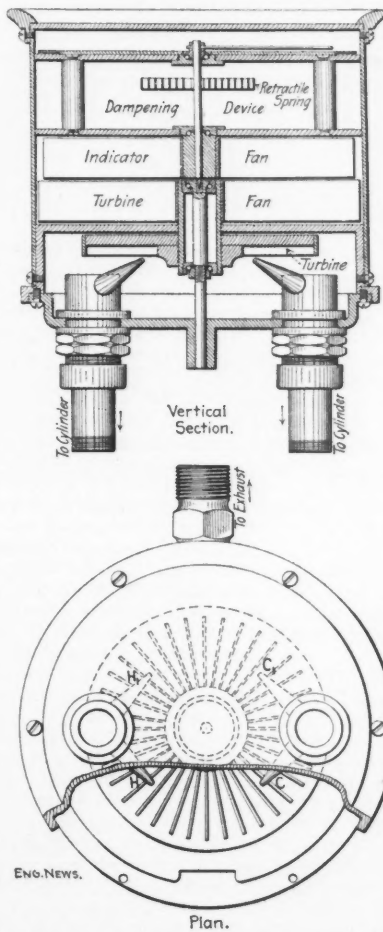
Section and Elevation of the Atwood Power Gage, Showing Arrangement of Parts.
